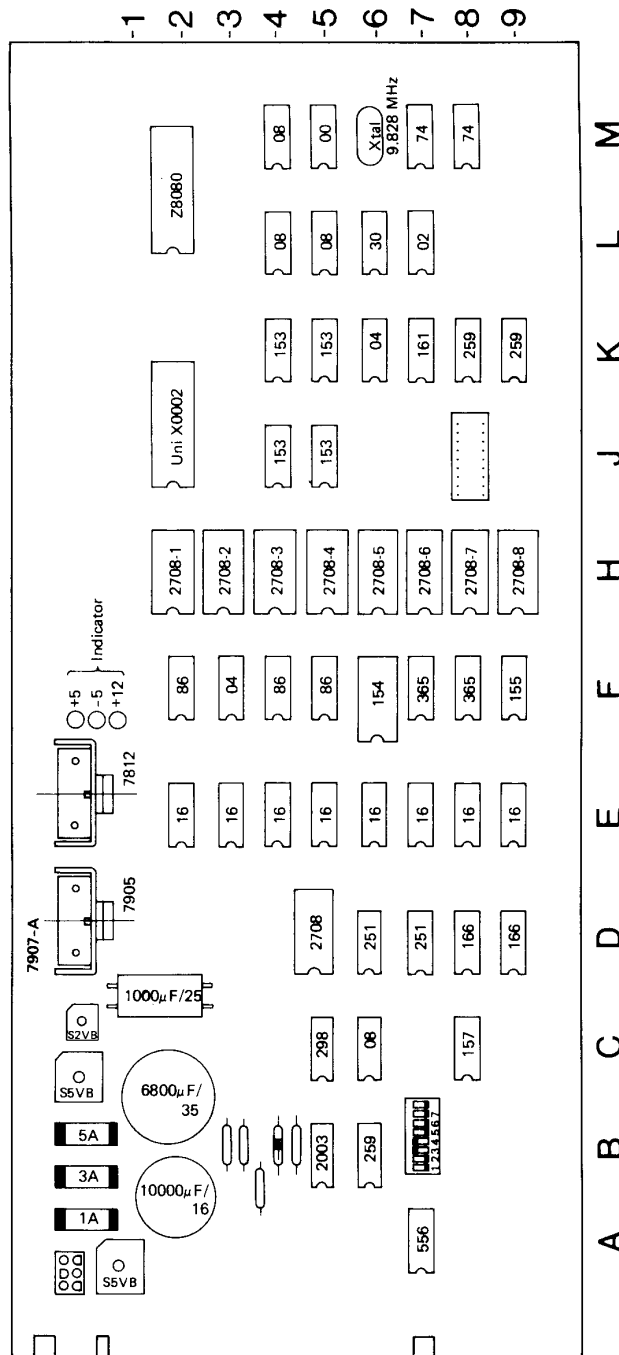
Component Parts Related to Switches in the Cabinet
